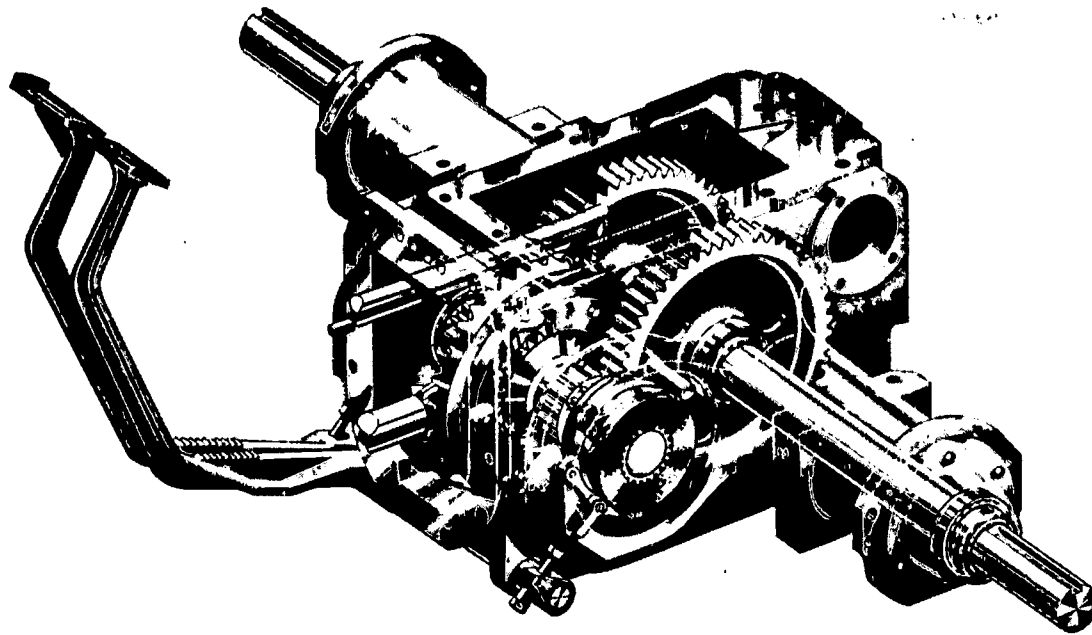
Exposed view of brakes, brake pedals, differential, bearings and gears. The gear train is lubricated by oil bath.
